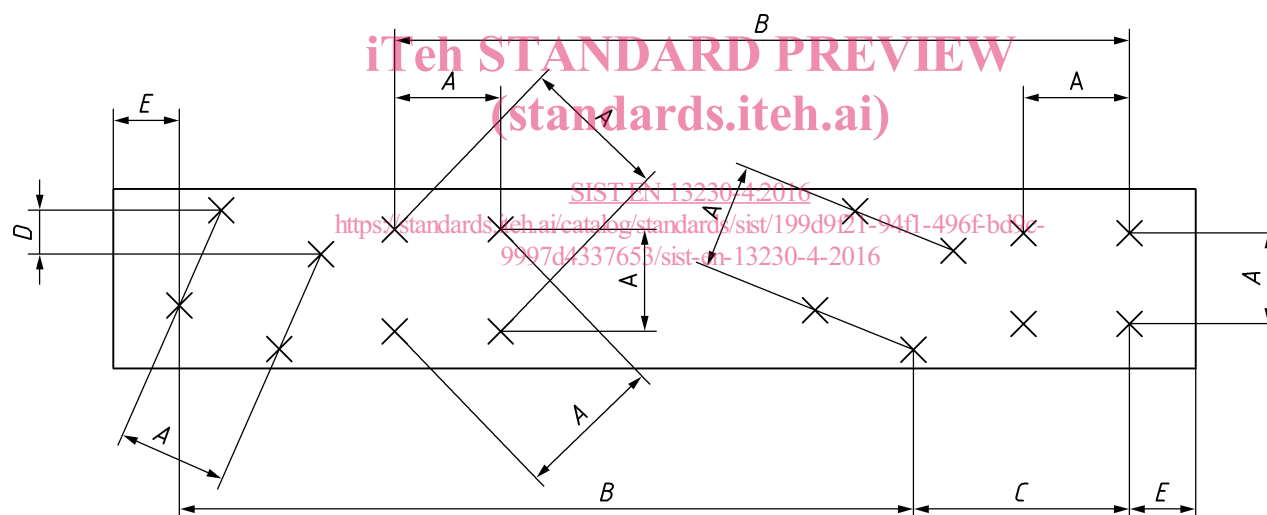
Measurement of tolerances on fastening components positioning
